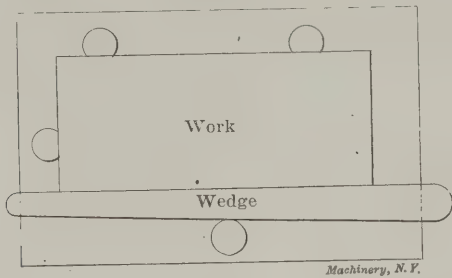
Wedge Acting as Clamp in Drill Jig.
